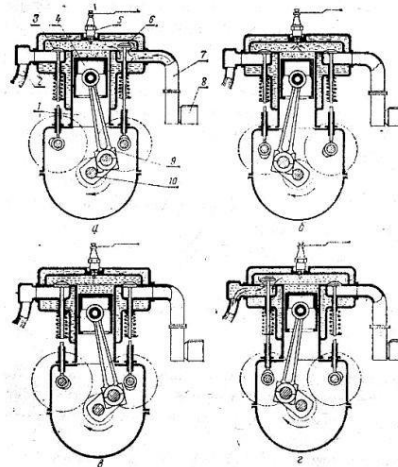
The working process of a four-stroke, single-cylinder carburetor engine.
